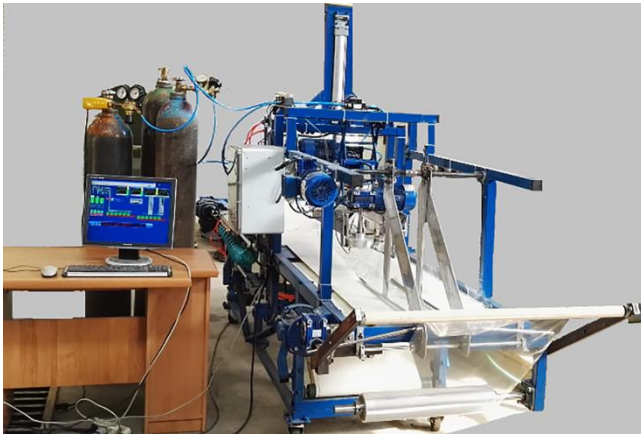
The fabricated HFFS plant for MA packaging of fresh vegetables. HFFS, horizontal form-fill-seal
